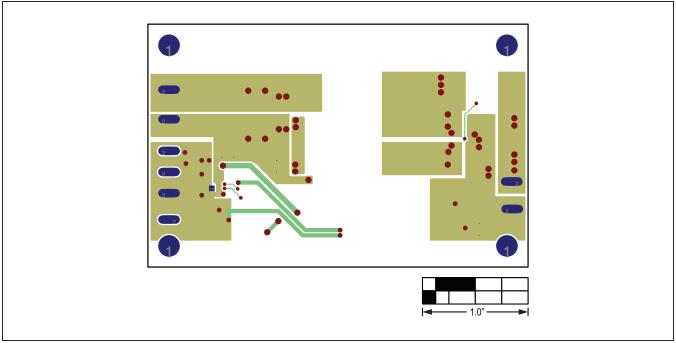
MAX17598 EV Kit PCB Layout—Solder Side
